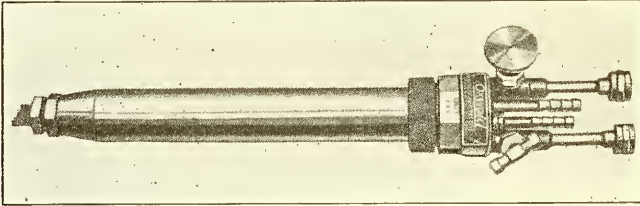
The Oxweld Water-Cooled Multiple-Jet Welding Torch, Type W-5.
